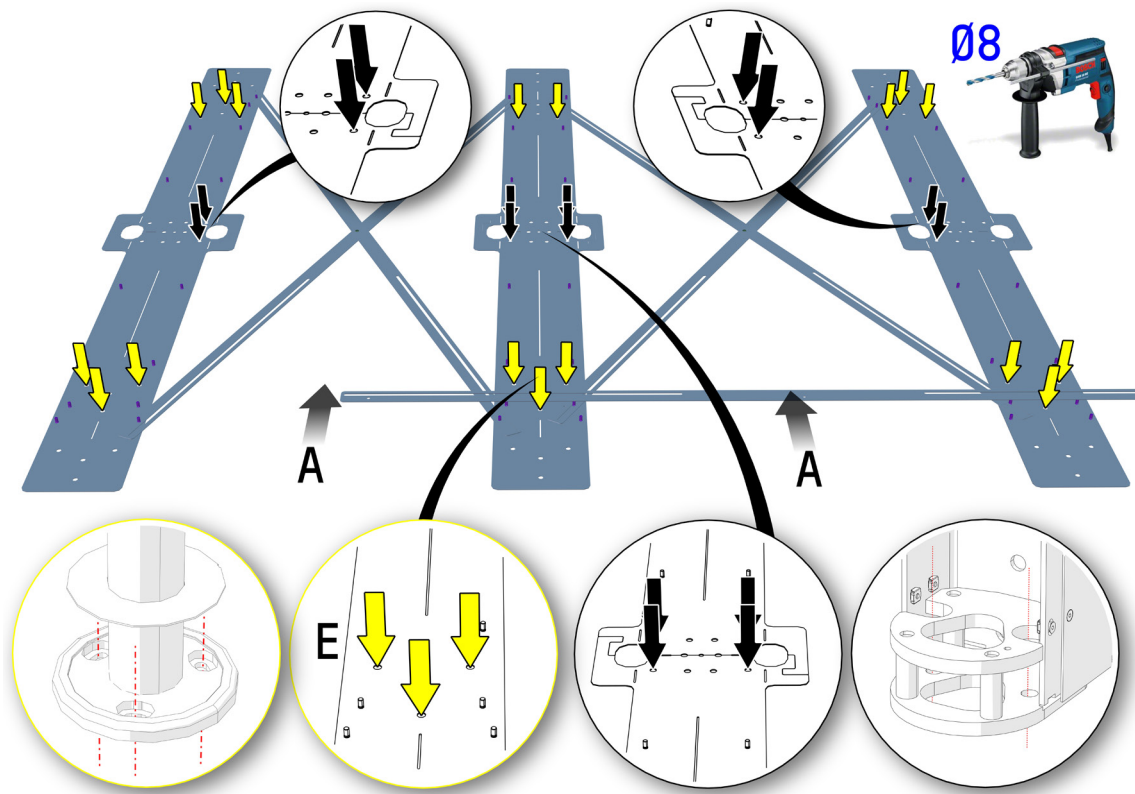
Railing post and kinematic post anchoring points - SC models (short).
